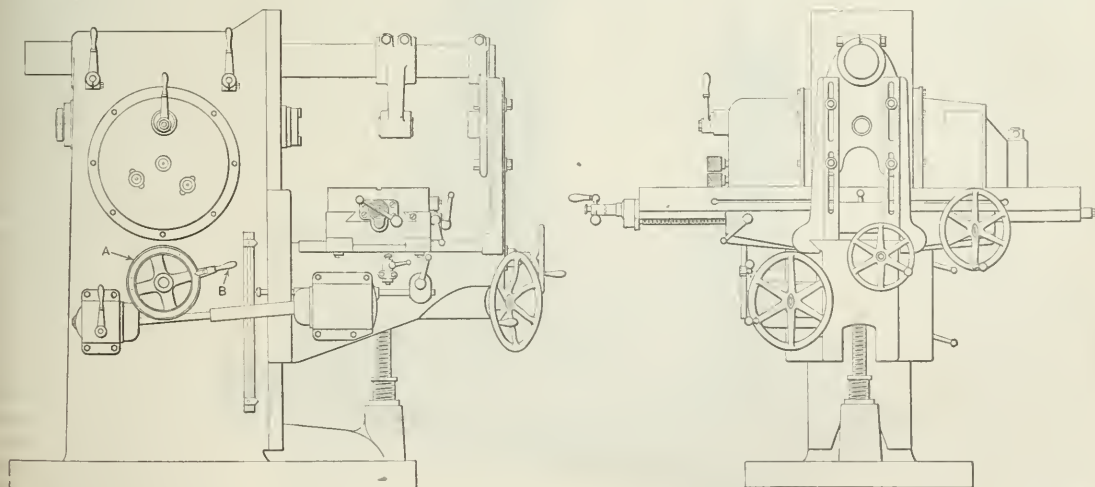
Conradson No. 3 Plain Milling Machine with Duplex Helical Drive
